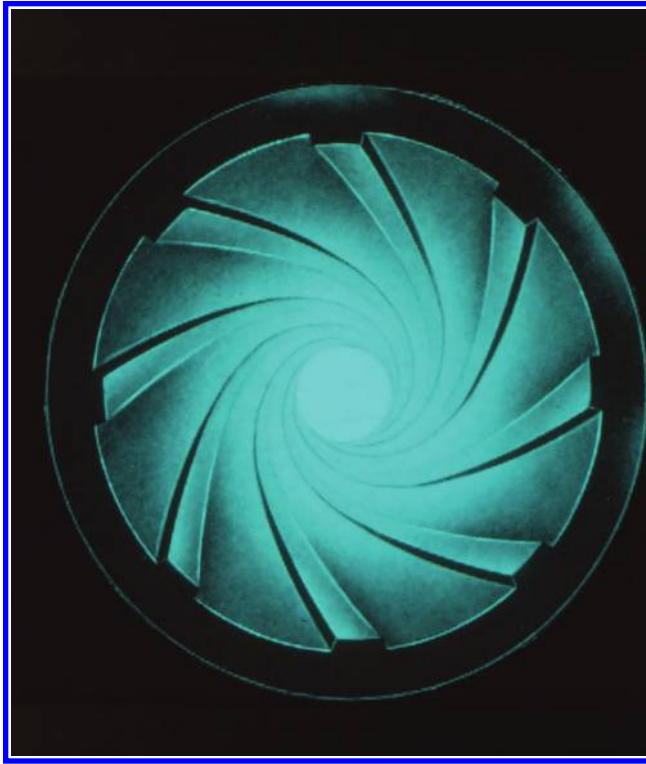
Cross section of barrel with traditional rifling; right-hand twist.
